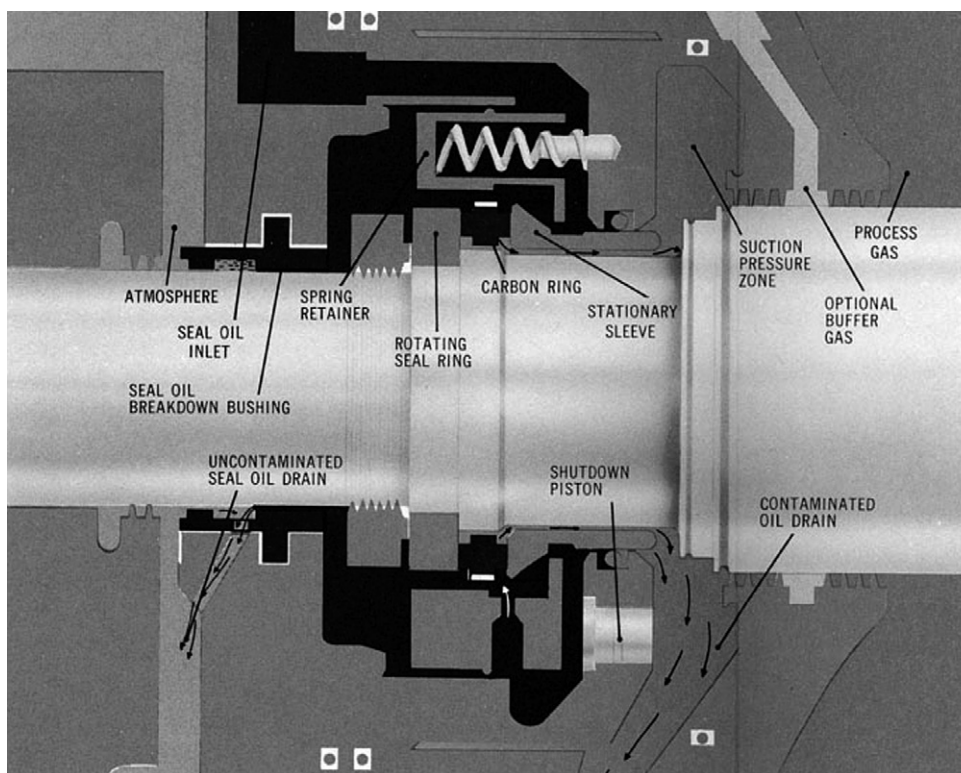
• Compressor contact seal (Courtesy of Elliott Co.)
